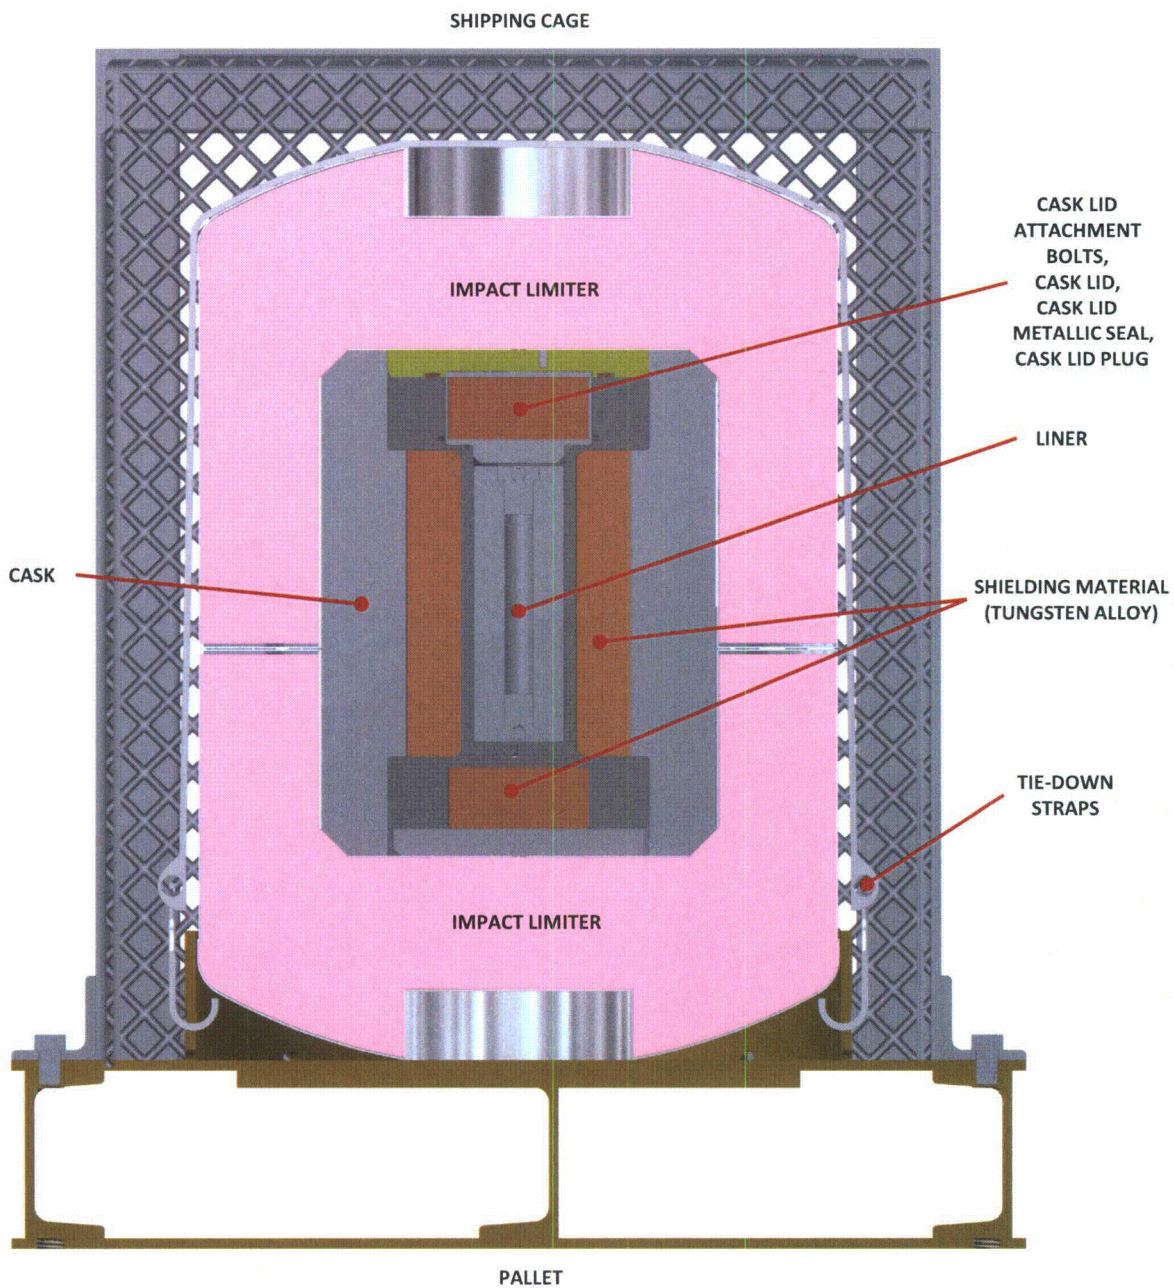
Assembled Transport Package Cutaway – Model AOS-025A
